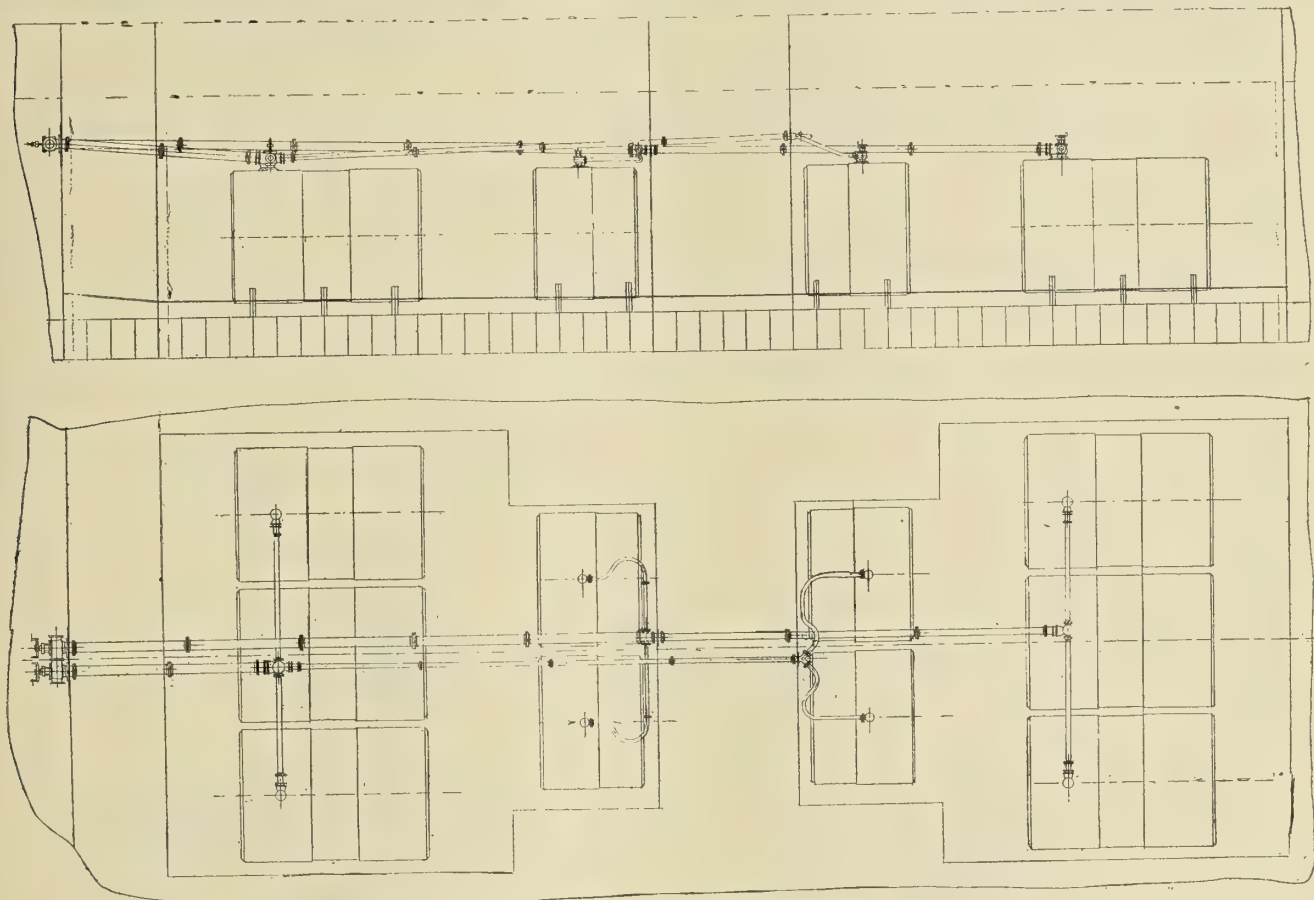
MAIN STEAM-PIPE ARRANGEMENT, WROUGHT-IRON PIPES.
